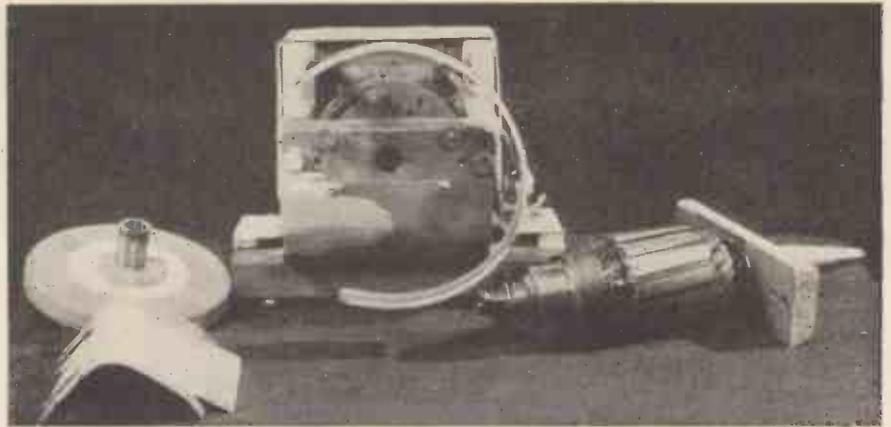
Showing the various parts of the grinder ready for assembly.
